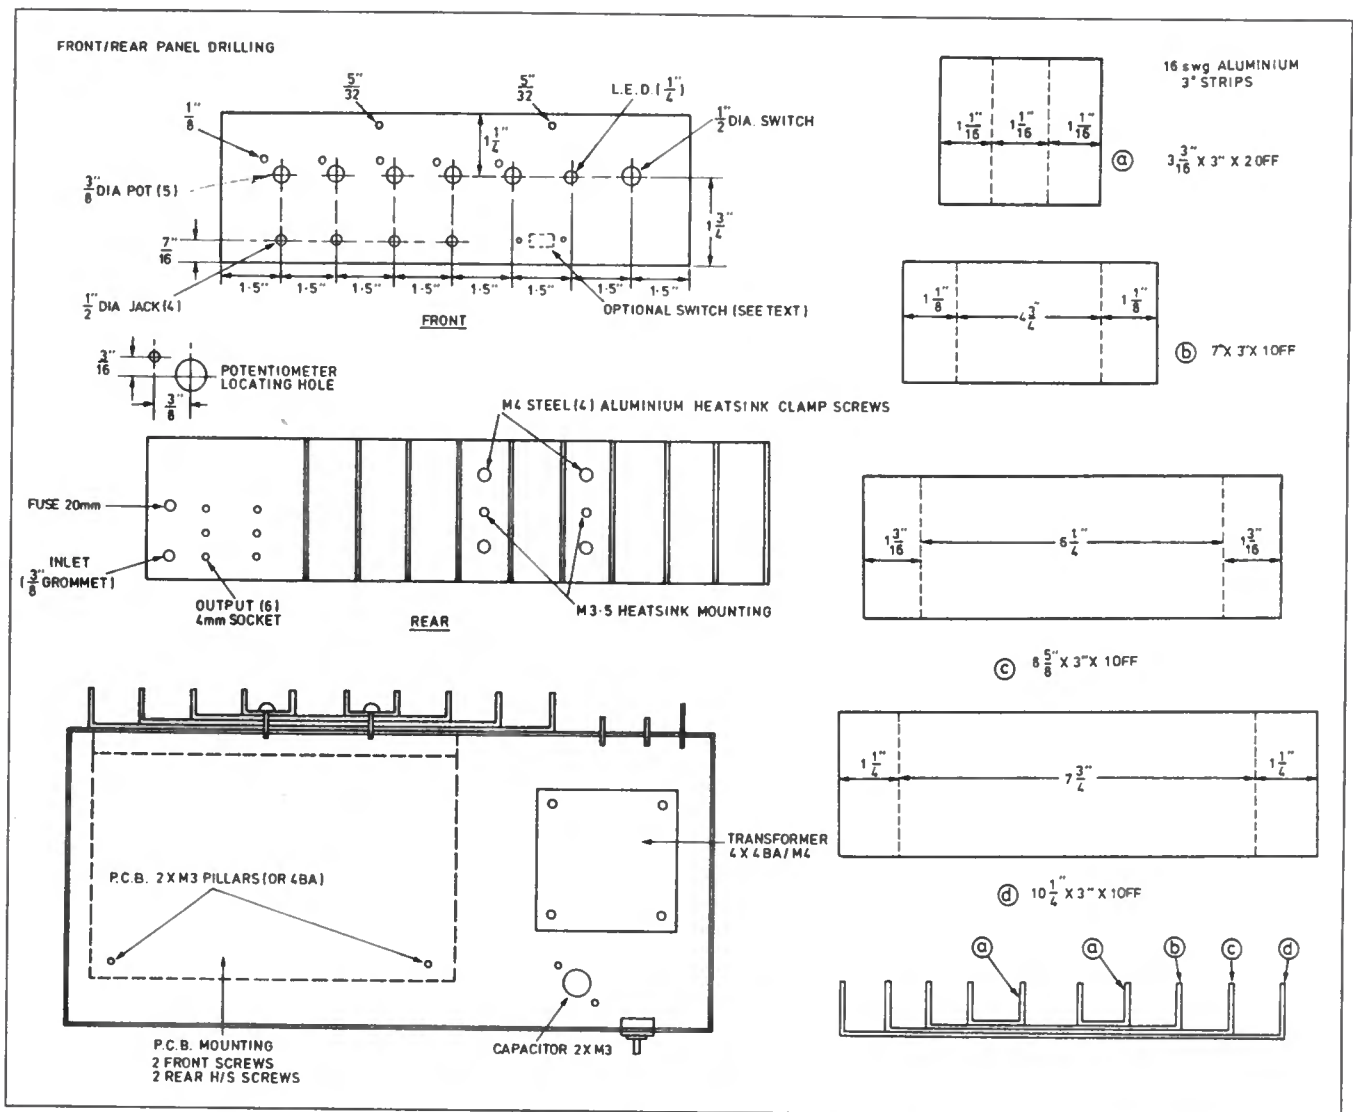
Case drilling details plus heatsink cutting dimensions and assembly.
